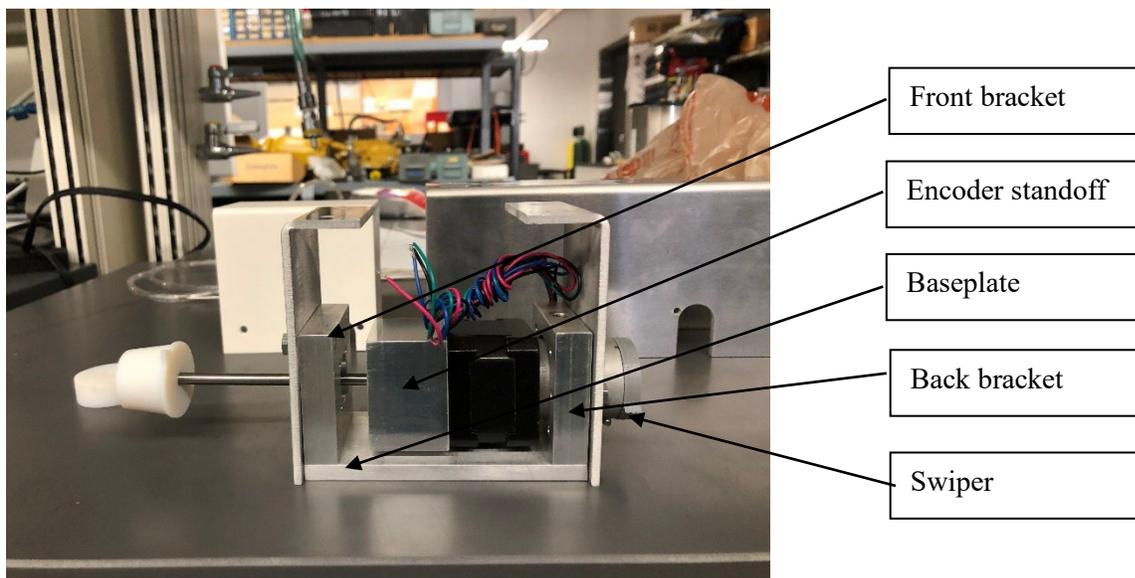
Mechanical assembly for second-generation automated blend valve controller
